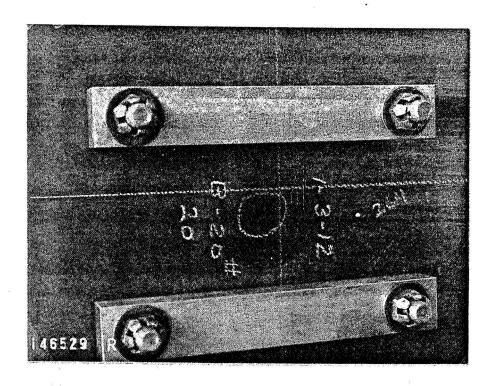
Impact Side Leakage of 48-Ply AS4/2220 Panel Impacted at 20 Ft.-Lb. With a Fuel Pressure of 5 psi.
